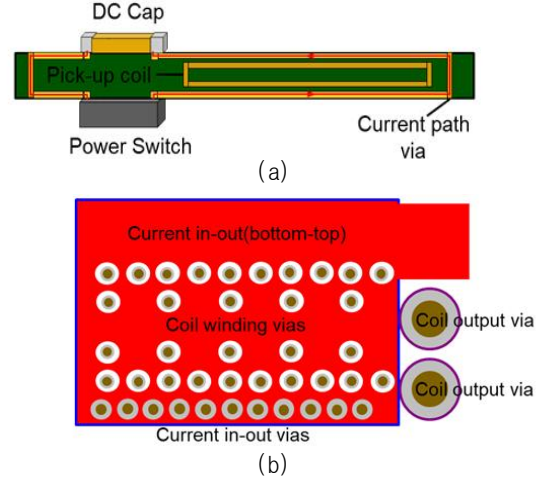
PCB pick-up coil design in (a) side view, (b) top view.
